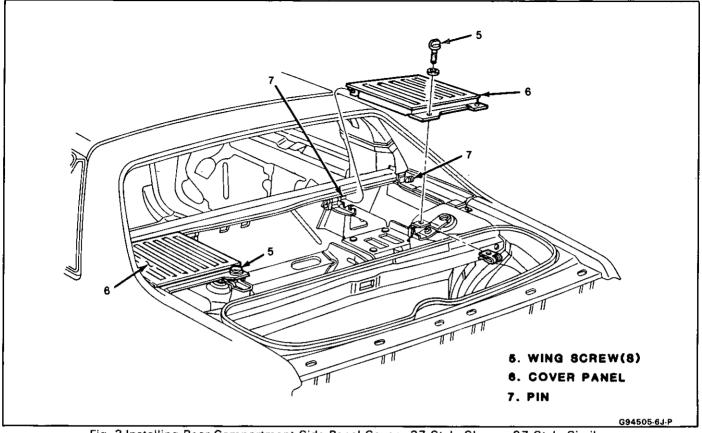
Installing Rear Compartment Side Panel Cover - 37 Style Shown, 97 Style Similar
